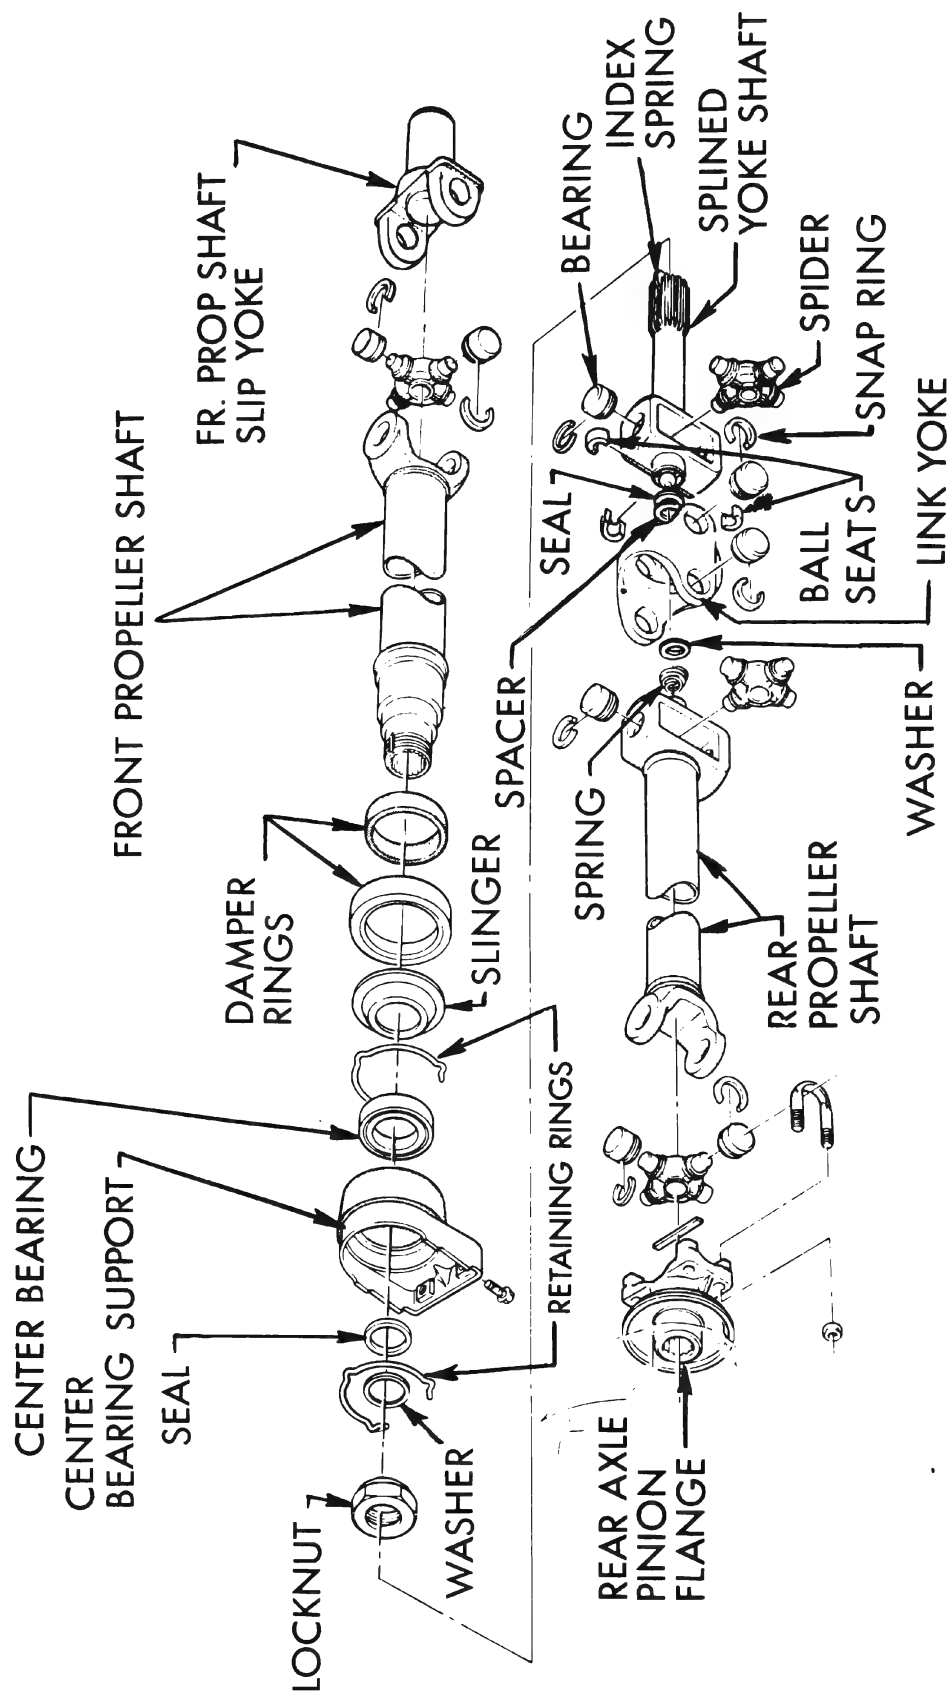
Exploded View—Propeller Shaft—4400-4600-4800 Series
